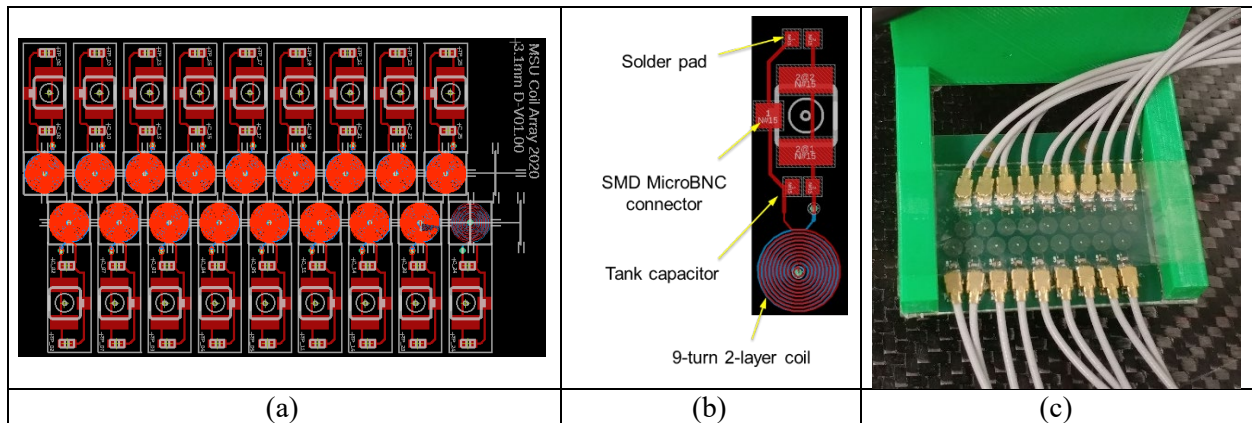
Prototype E-2a: (a) PCB design of a staggered 18-CH array; (b) PCB design of a single channel with solder pads for μ BNC connector; (c) fabricated array interfaced to the Ectane.
